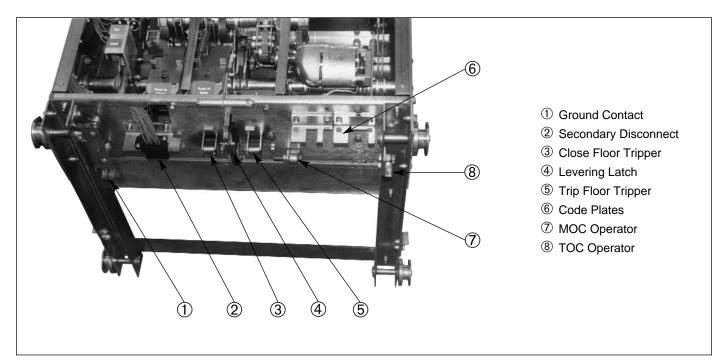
Typical VCP-W Circuit Breaker Bottom View
